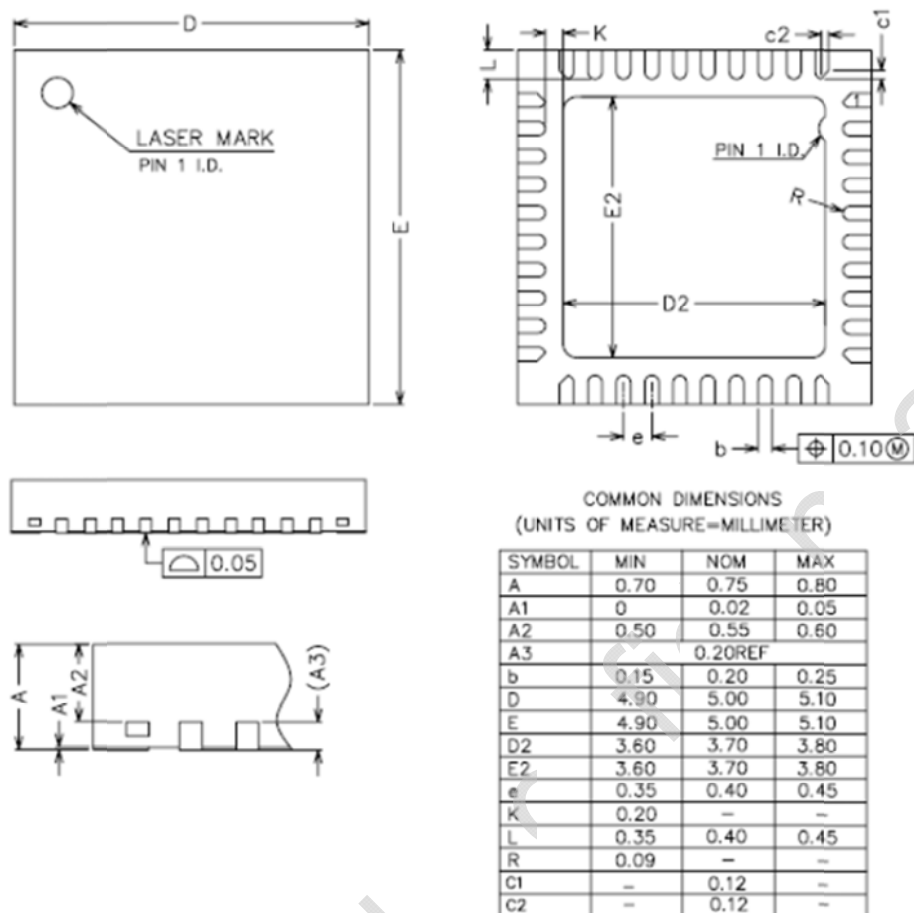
MXD2660A QFN40 Package Outline Drawing
